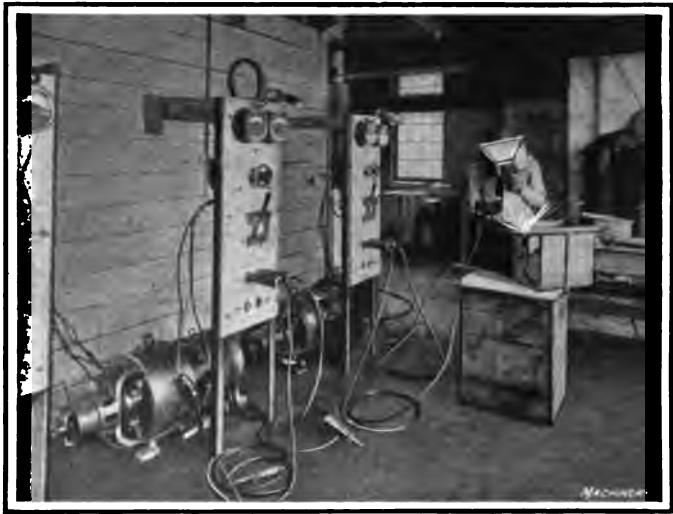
Lincoln Electric Co. Equipment for Arc Welding
